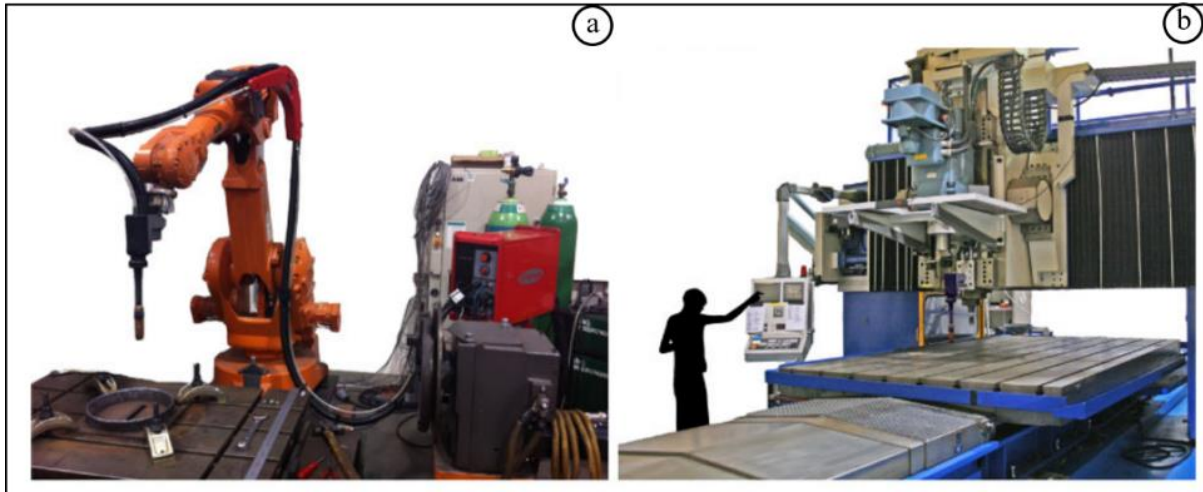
(a) six-axis welding robot and (b) deposition system retrofitted onto former friction stir welding machine[45]
